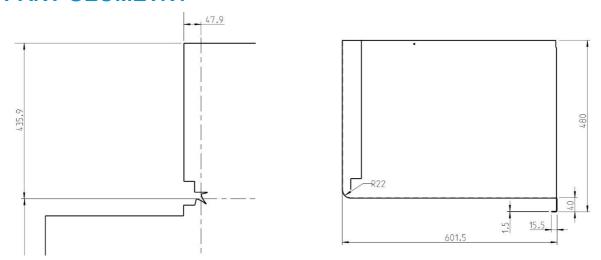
Typical cutting and bending drawing for rounded corner boxes.
